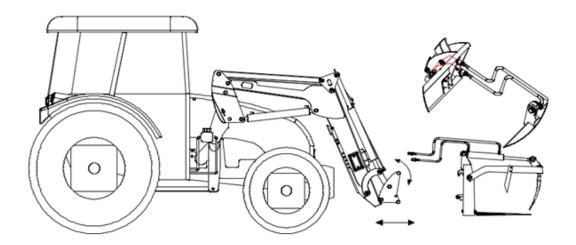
Installation of a tool that requires connection to the Loader's hydraulic system
